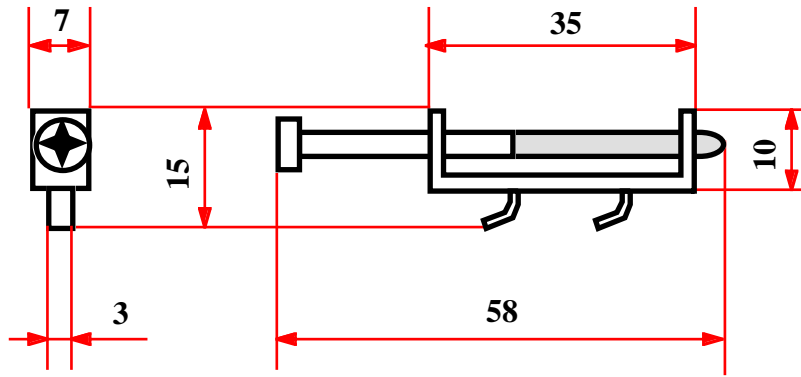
MOUNTING CLAMP DIMENSIONS
